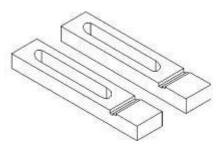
Crankshaft Real Seal Retainer Alignment Fixture 8225 Courtesy of CHRYSLER LLC
